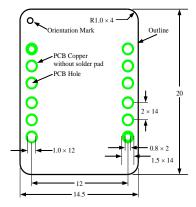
Top Side PCB Foot-print for the DIP Package Figure 23 shows the foot print which is seen from the top side of the PCB, therefore, it is a "see through" view.
